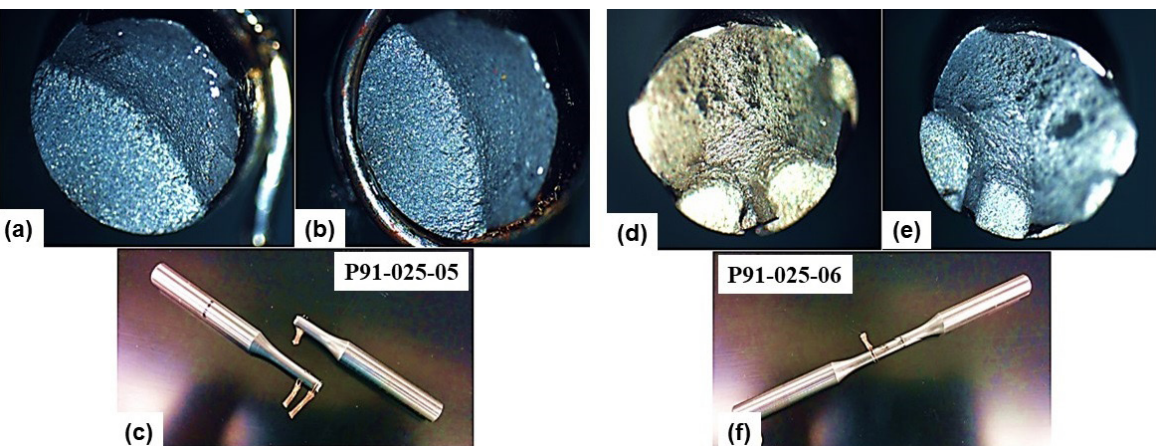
Broken specimen pictures. a) P91-025-05 fractured section taken by microscope; b) other half of the P91-025-05 fractured section; c) point of fracture; d) P91-025-06 fractured section taken by microscope; e) other half of the P91-025-05 fractured section; f) point of fracture.
